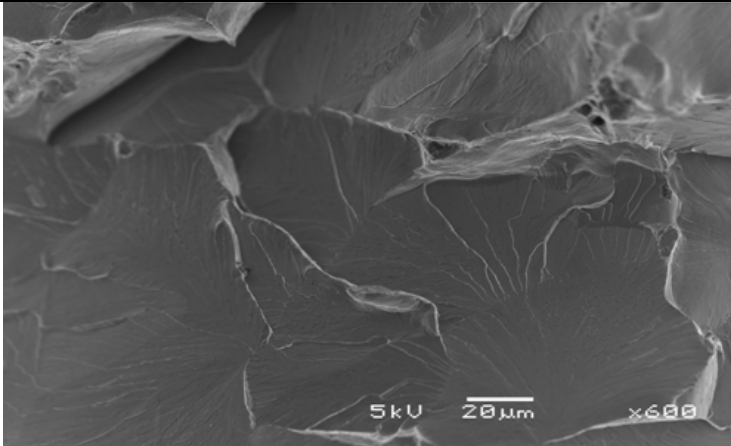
(b) shows the SEM microphotographs of the fractured surface of the weld metal of a GTAW weld in low and high magnification done at a heat input of 0.45 kJ/mm. The low magnification microphotograph shows the fracture was brittle cleavage fracture. The coarse columnar grain structure is also evident from this microphotograph and it is consistent with earlier findings of this work (see Figure 5.5(d)). The high magnification microphotograph shows the river line pattern in the fractured grain.
